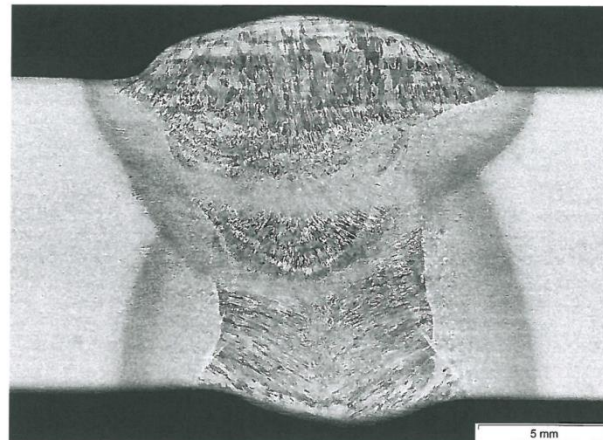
General view of metallographic section 174_MG perpendicular to the weld axis
